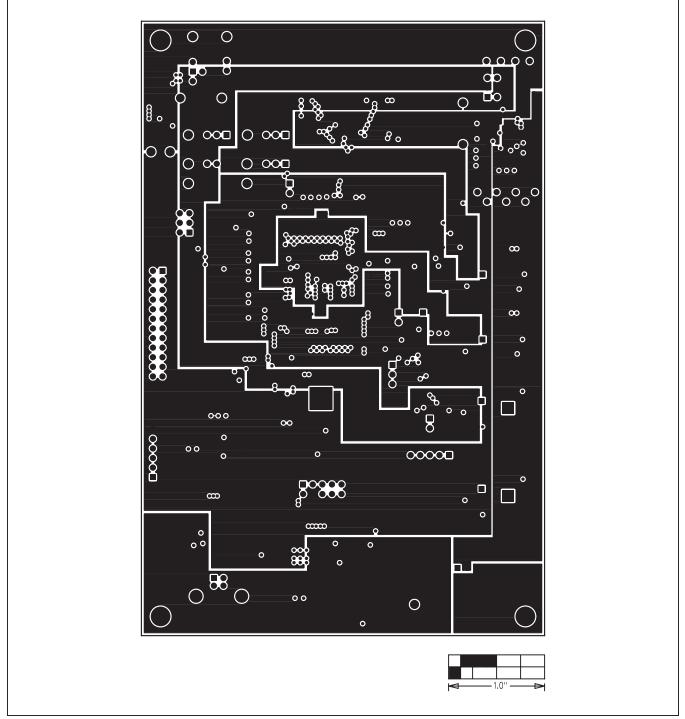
MAX44005 EV Kit PCB Layout—Layer 3
